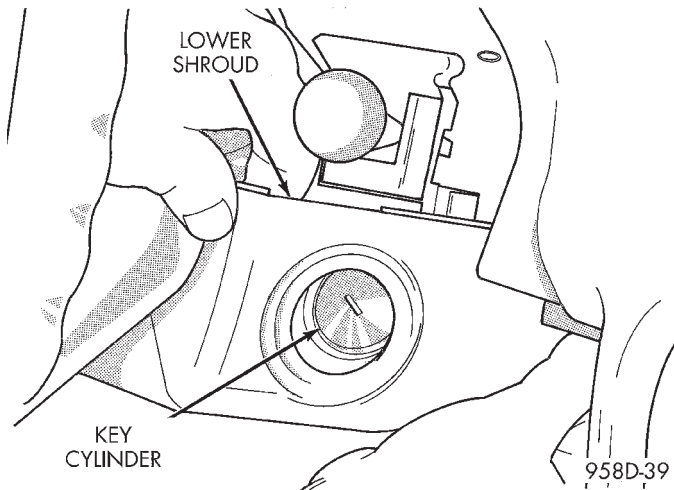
Remove Lower Shroud From Ignition Cylinder
